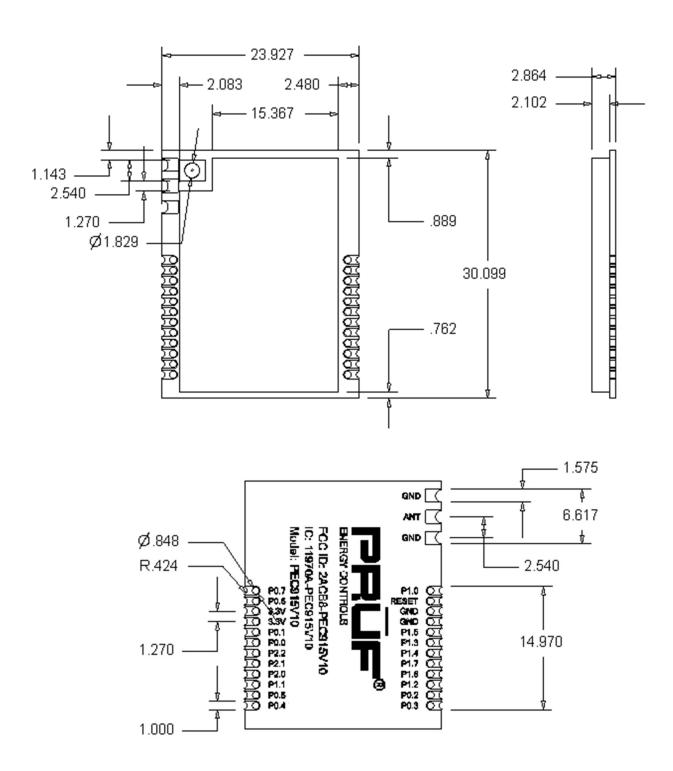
PEC915V10 Dimensions (all dimensions in mm; not to scale)
